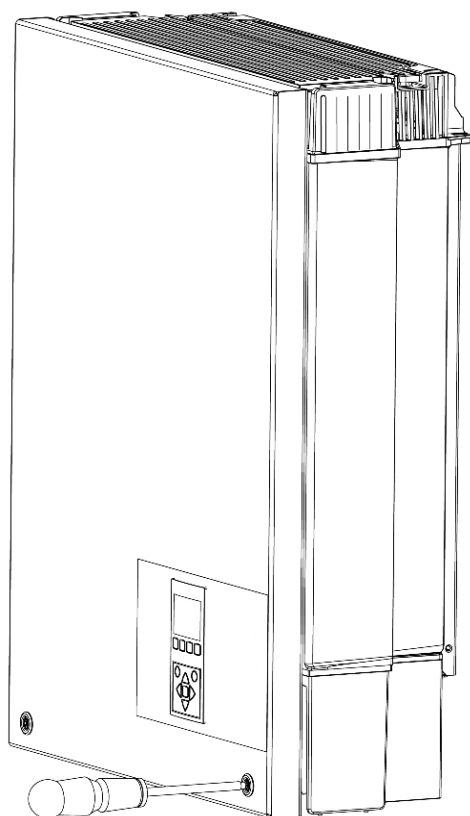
Fasten Front Screws and Ensure Proper PE Connection
